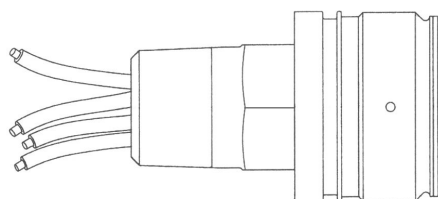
Drawing of a 057-77\* Electrical Snap-Switch.
